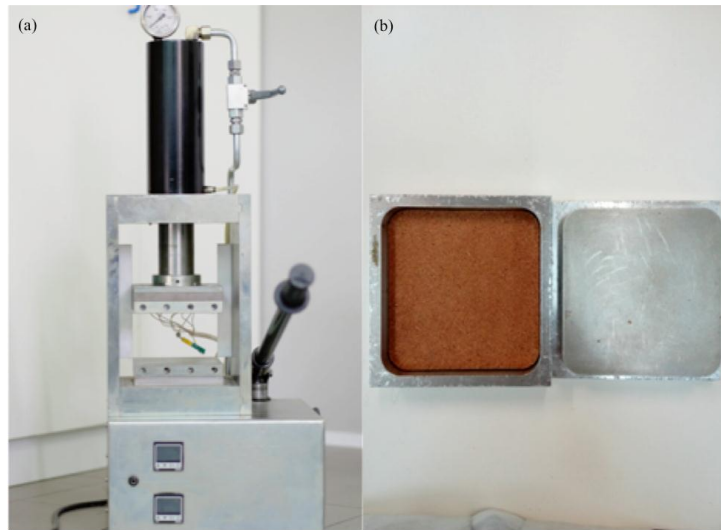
Experimental system used for the composites production: (a) hydraulic press; (b) mold.
